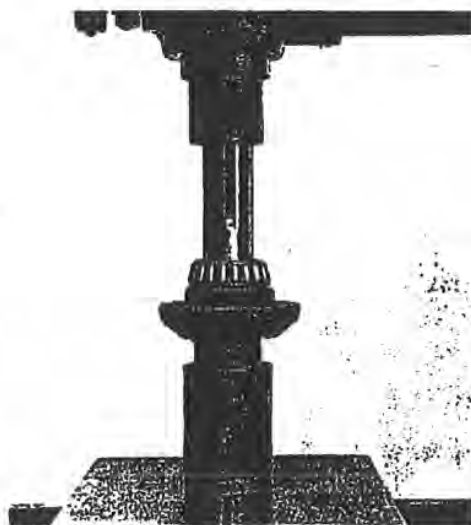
Pressing Shaft out of Bearing and Gear
